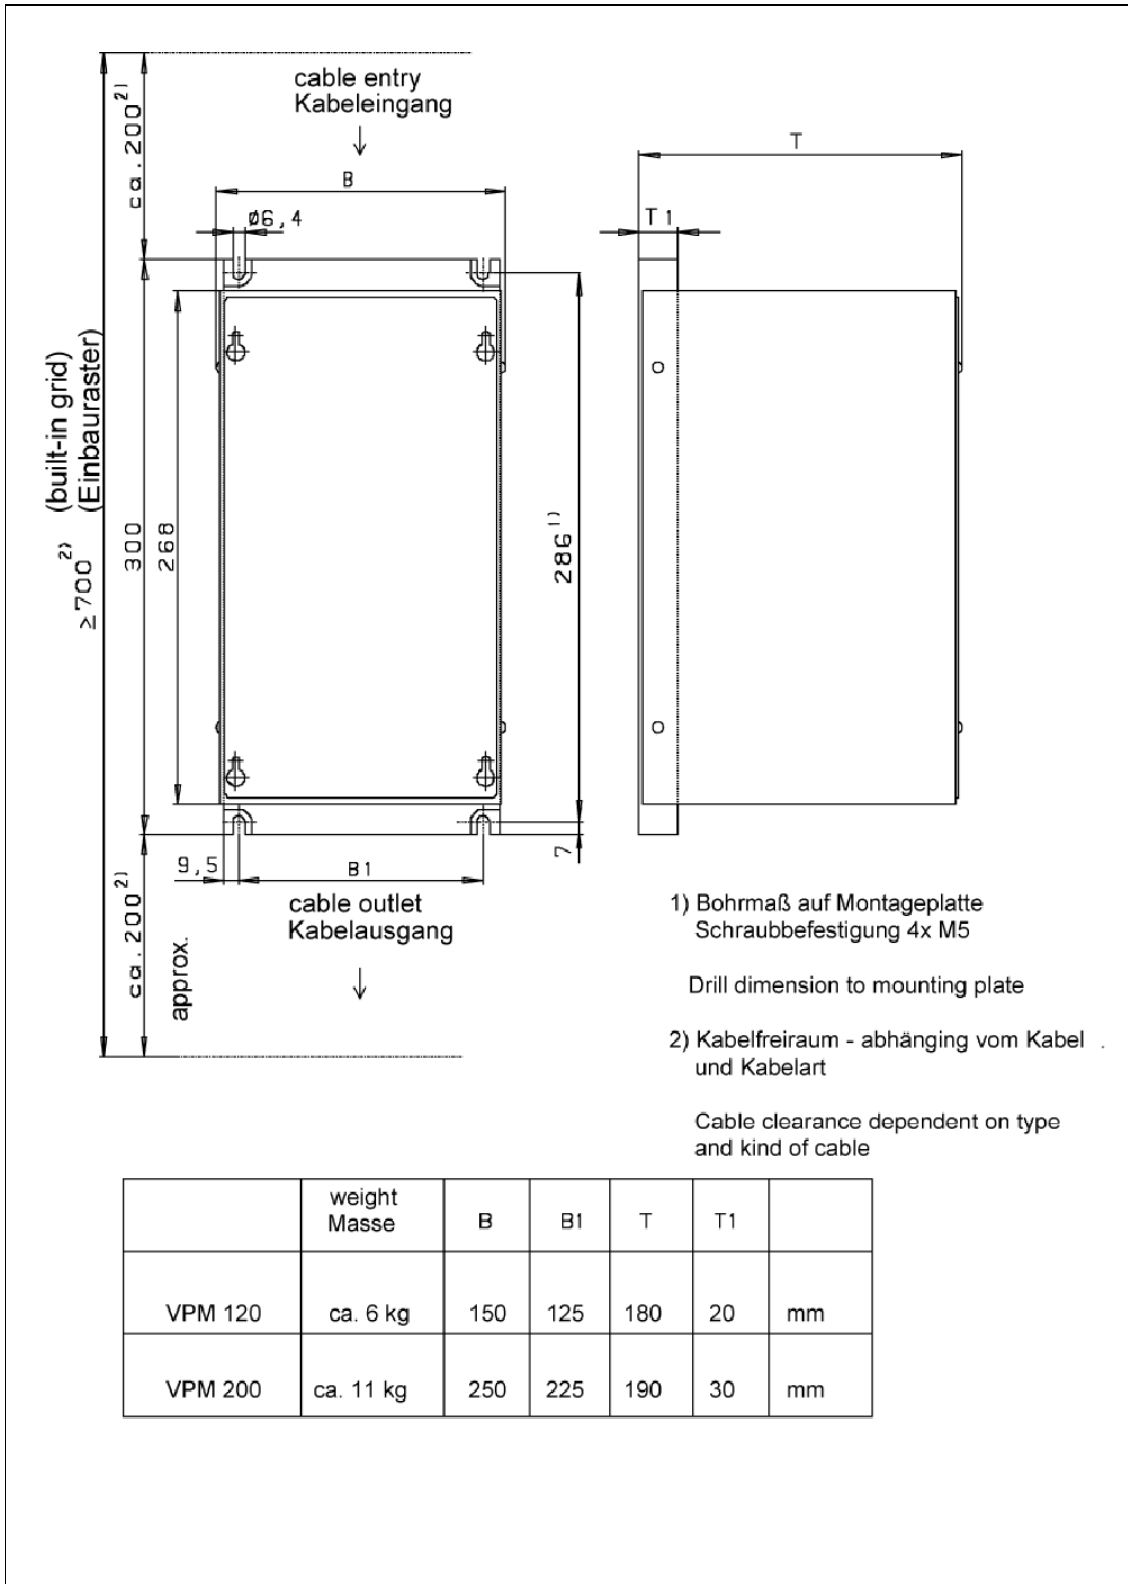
VPM 120 / VPM 200, dimension drawing
